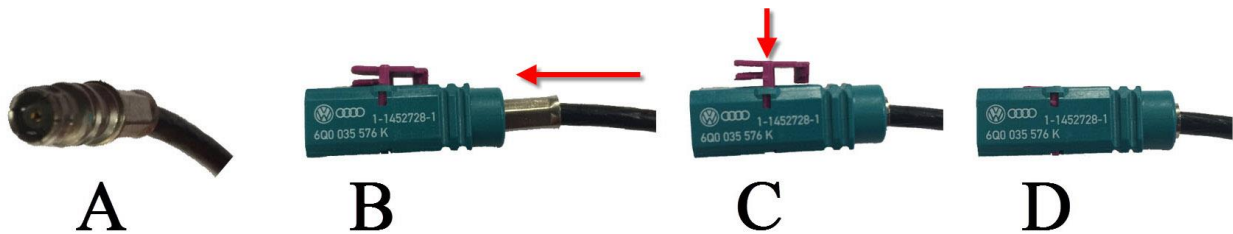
A: Coaxial wire with female coaxial terminal end installed. B: Insert female coaxial terminal end into FAKRA connector until fully seated. C: Coaxial female terminal is fully seated in FAKRA connector, press down the locking tab of the FAKRA connector. D: Completed assembly.
